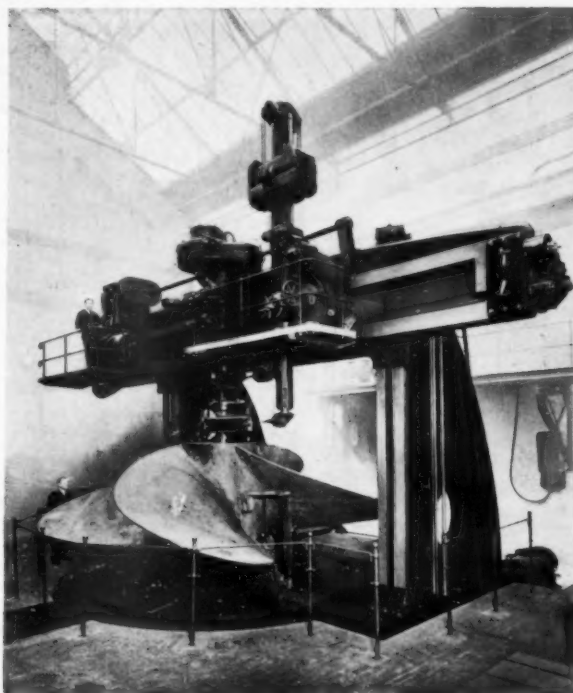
A general view of the boring mill in operation machining the face of a large propeller.
